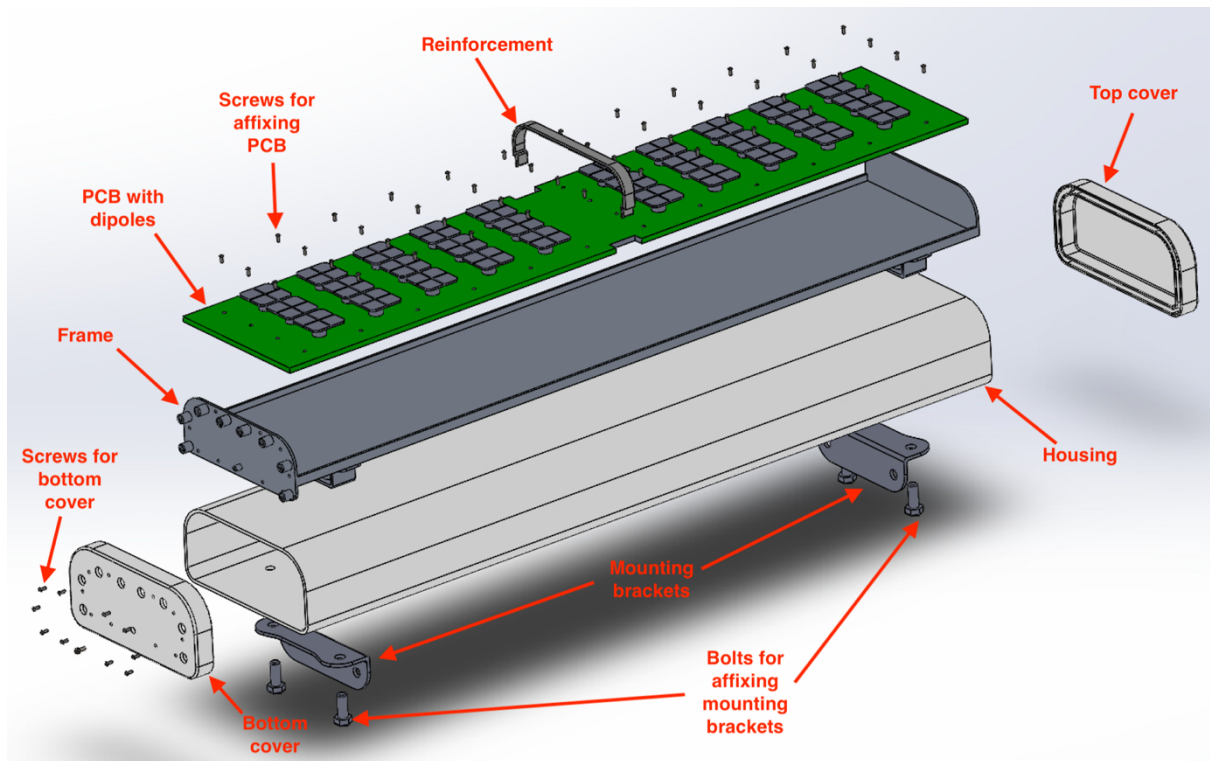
Exploded view of SISO-700/2700-12/15 DBI (cables not shown)
